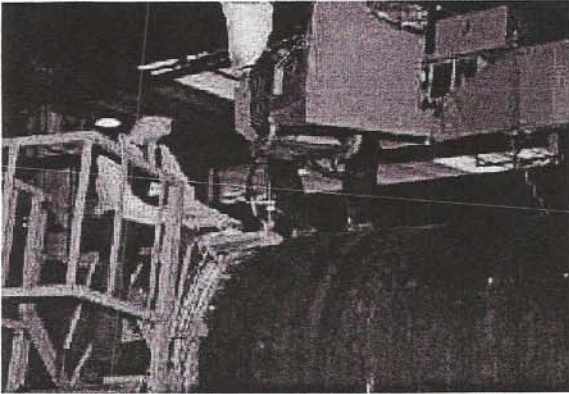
Welding of a circumferential joint being carried out while demagnetisation is in process
